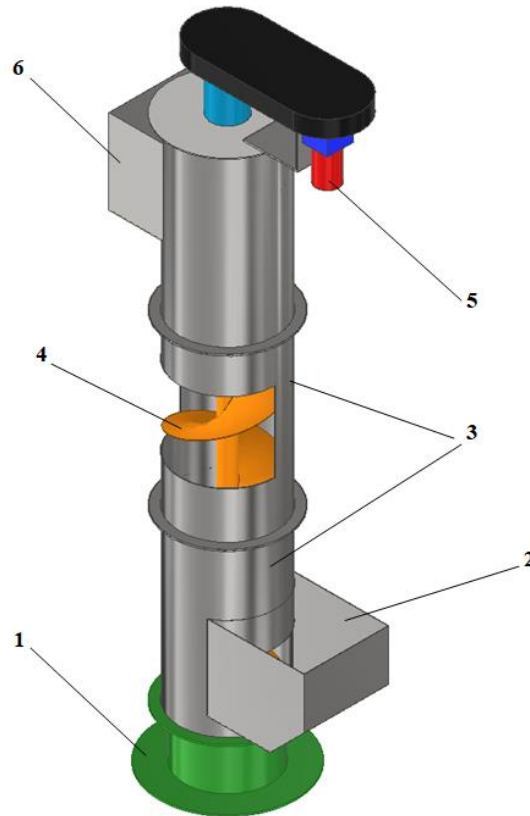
The spatial model of the conveyor: 1 – base, 2 – feeding chamber, 3 – trough segments, 4 – screw shaft, 5 – driving unit, 6 – outlet stub
